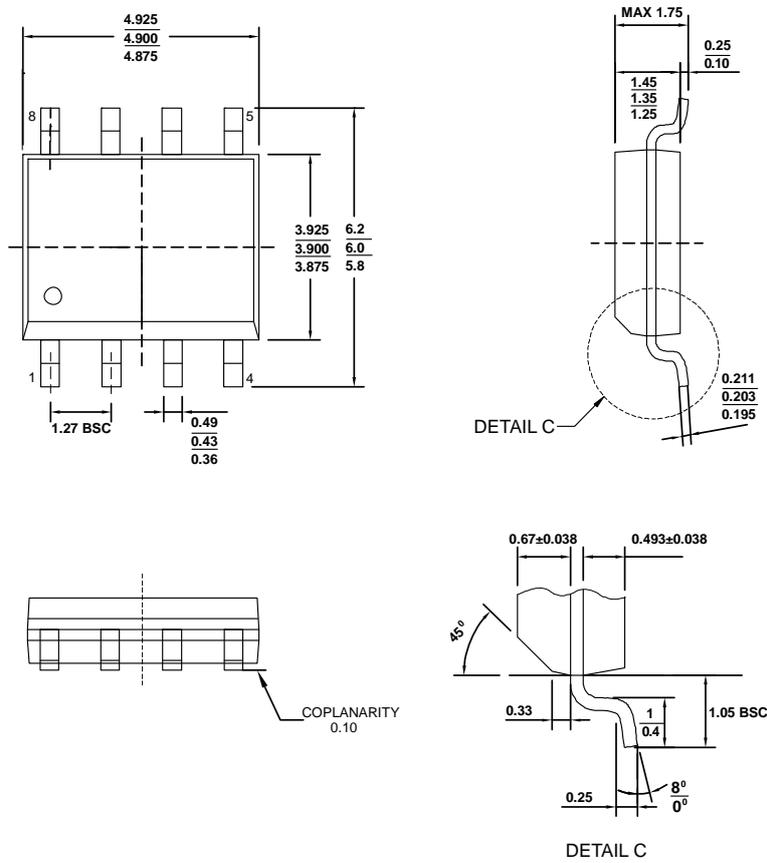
8-Lead SOIC Package Dimensions shown in millimeters
